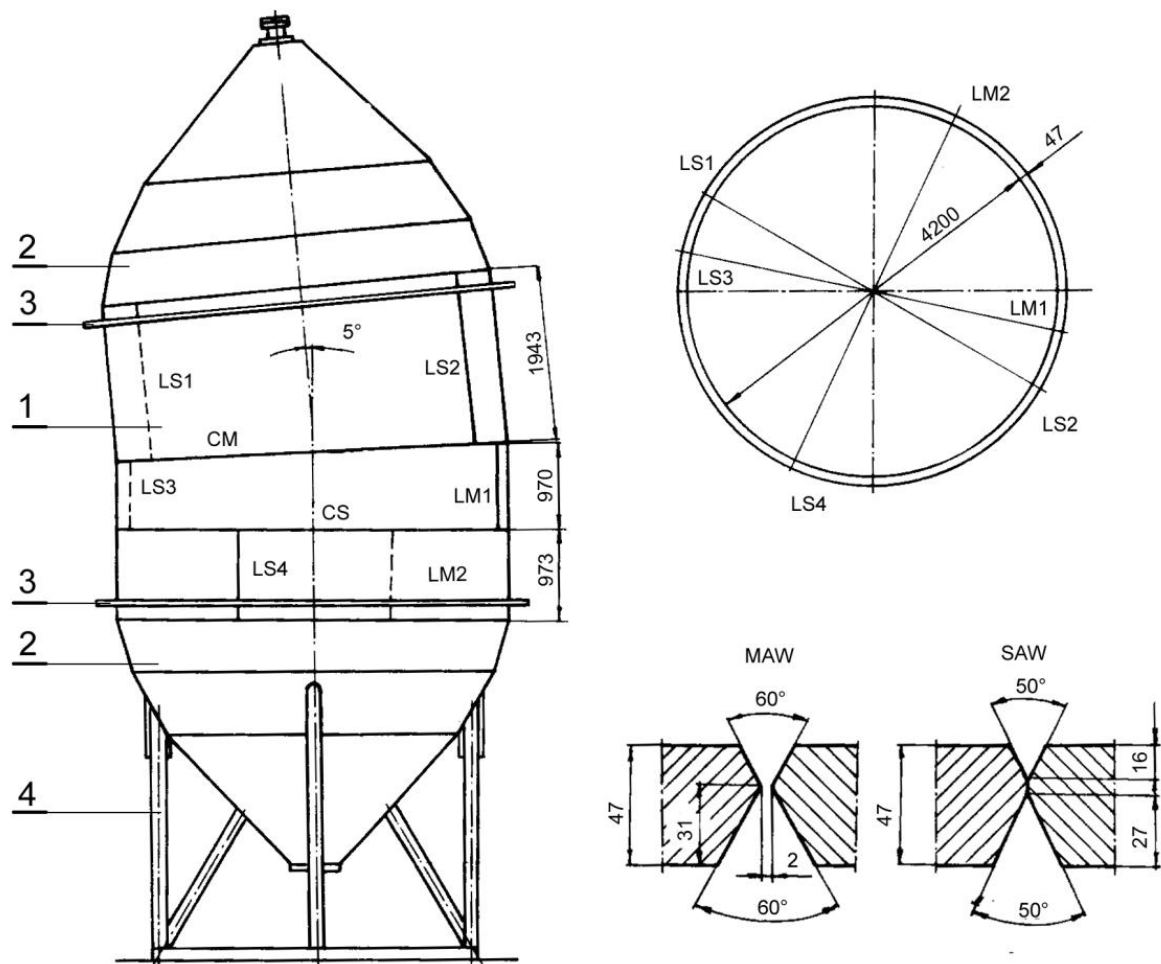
Design of penstock segment full-scale model: 1 - mantle; 2 - lid; 3 - stiffener; 4 - supports, L - Longitudinal, C - Circular; MAW – shielded manual arc welding (M); SAW - submerged arc welding, [2]
